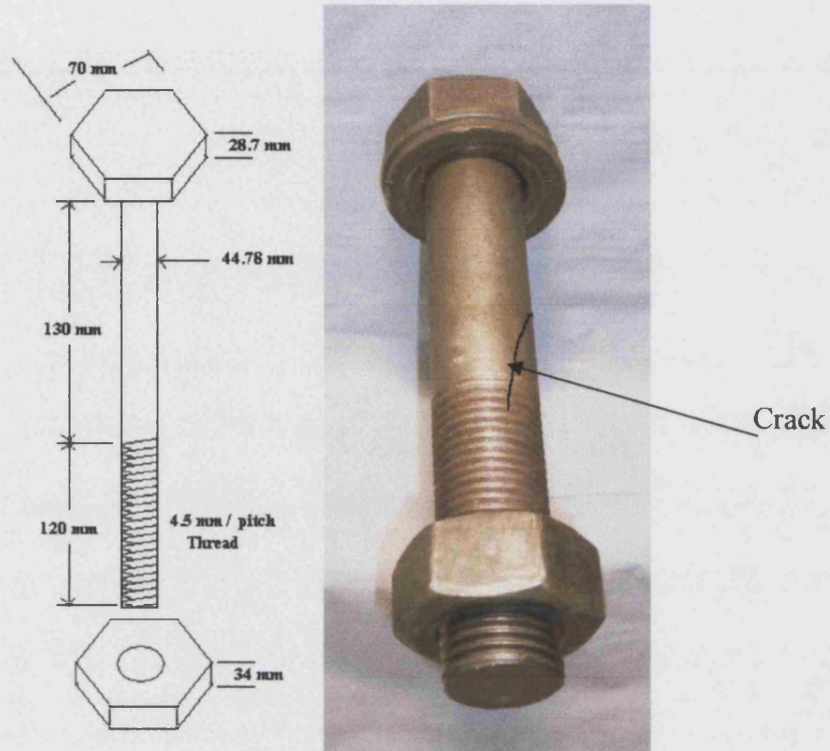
70 mm High Tensile Shell Flange Bolt, Showing Stress Cracking
